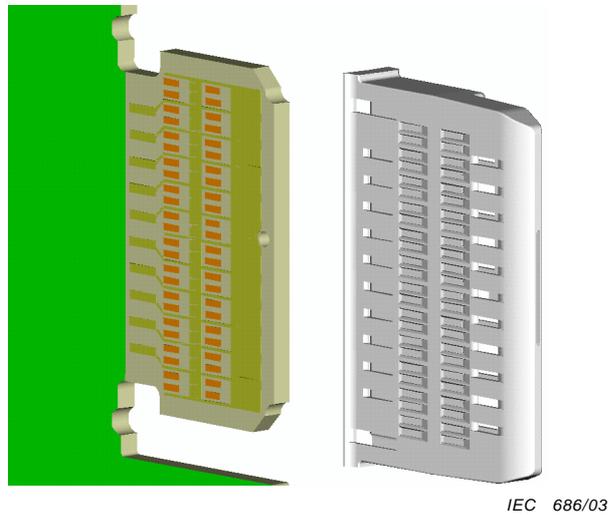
Example of a paddle-guard, to be mounted on the plug-in card paddle
